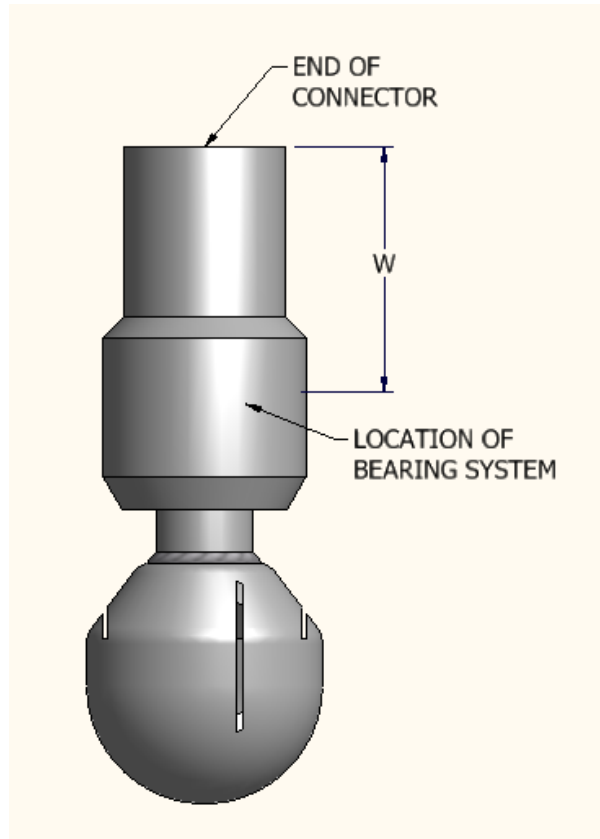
Distance W from end of Weld Connector to Bearing Balls
